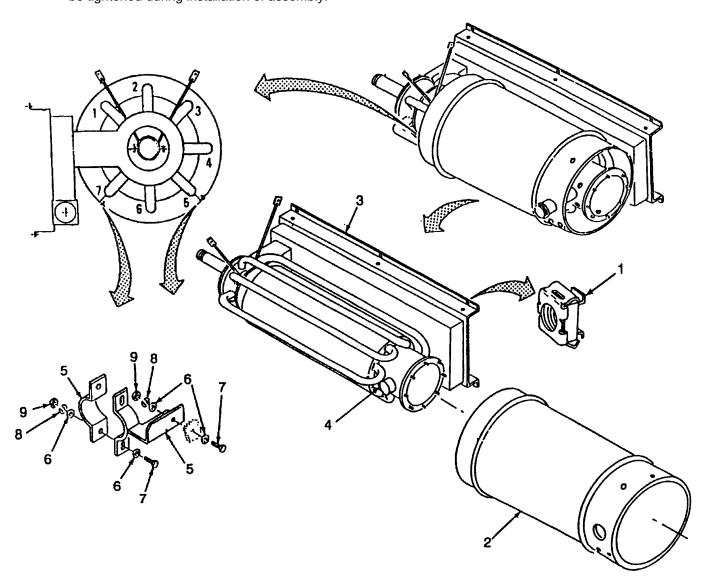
Heat Exchanger, (Model H120) Assembly
